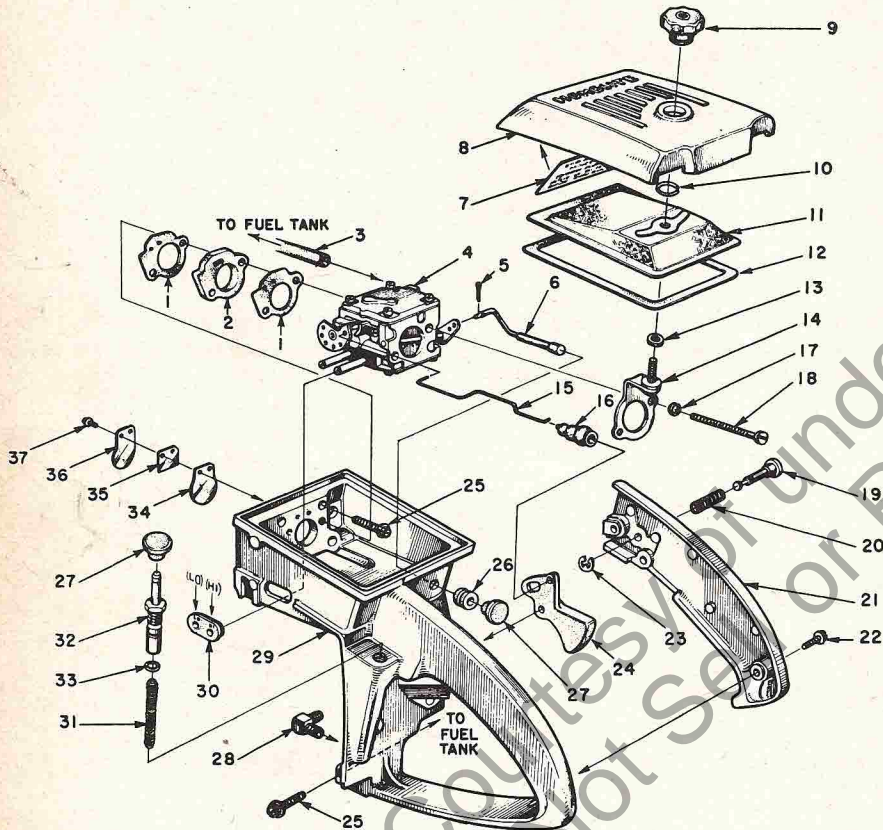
Exploded view of air box (throttle handle) and related parts on models with flat reed intake valve (34). Refer to Fig. HL30A for models equipped with pyramid reed valve.
